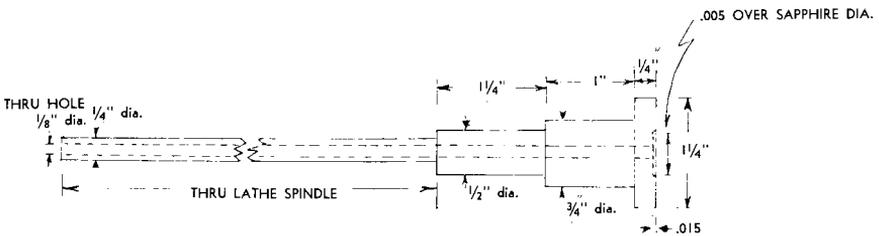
Sapphire Window — Lathe Fixture — Nichrome or Stainless Steel
